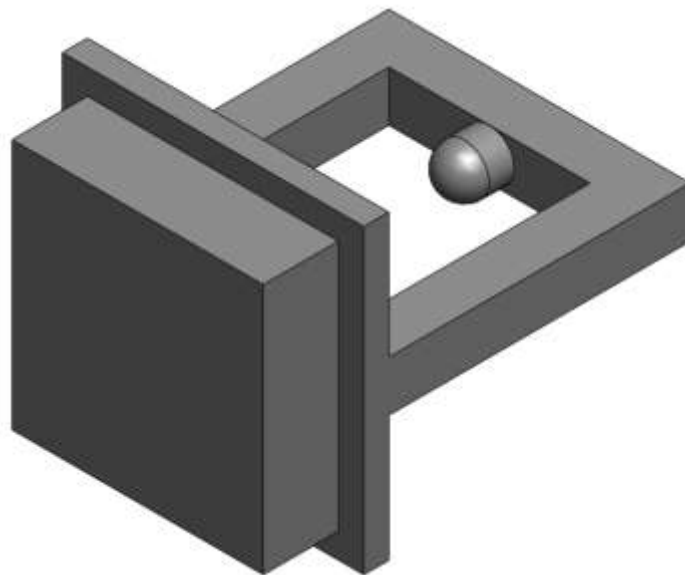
CAD model of the push buttons that hold the battery pack to the main unit
